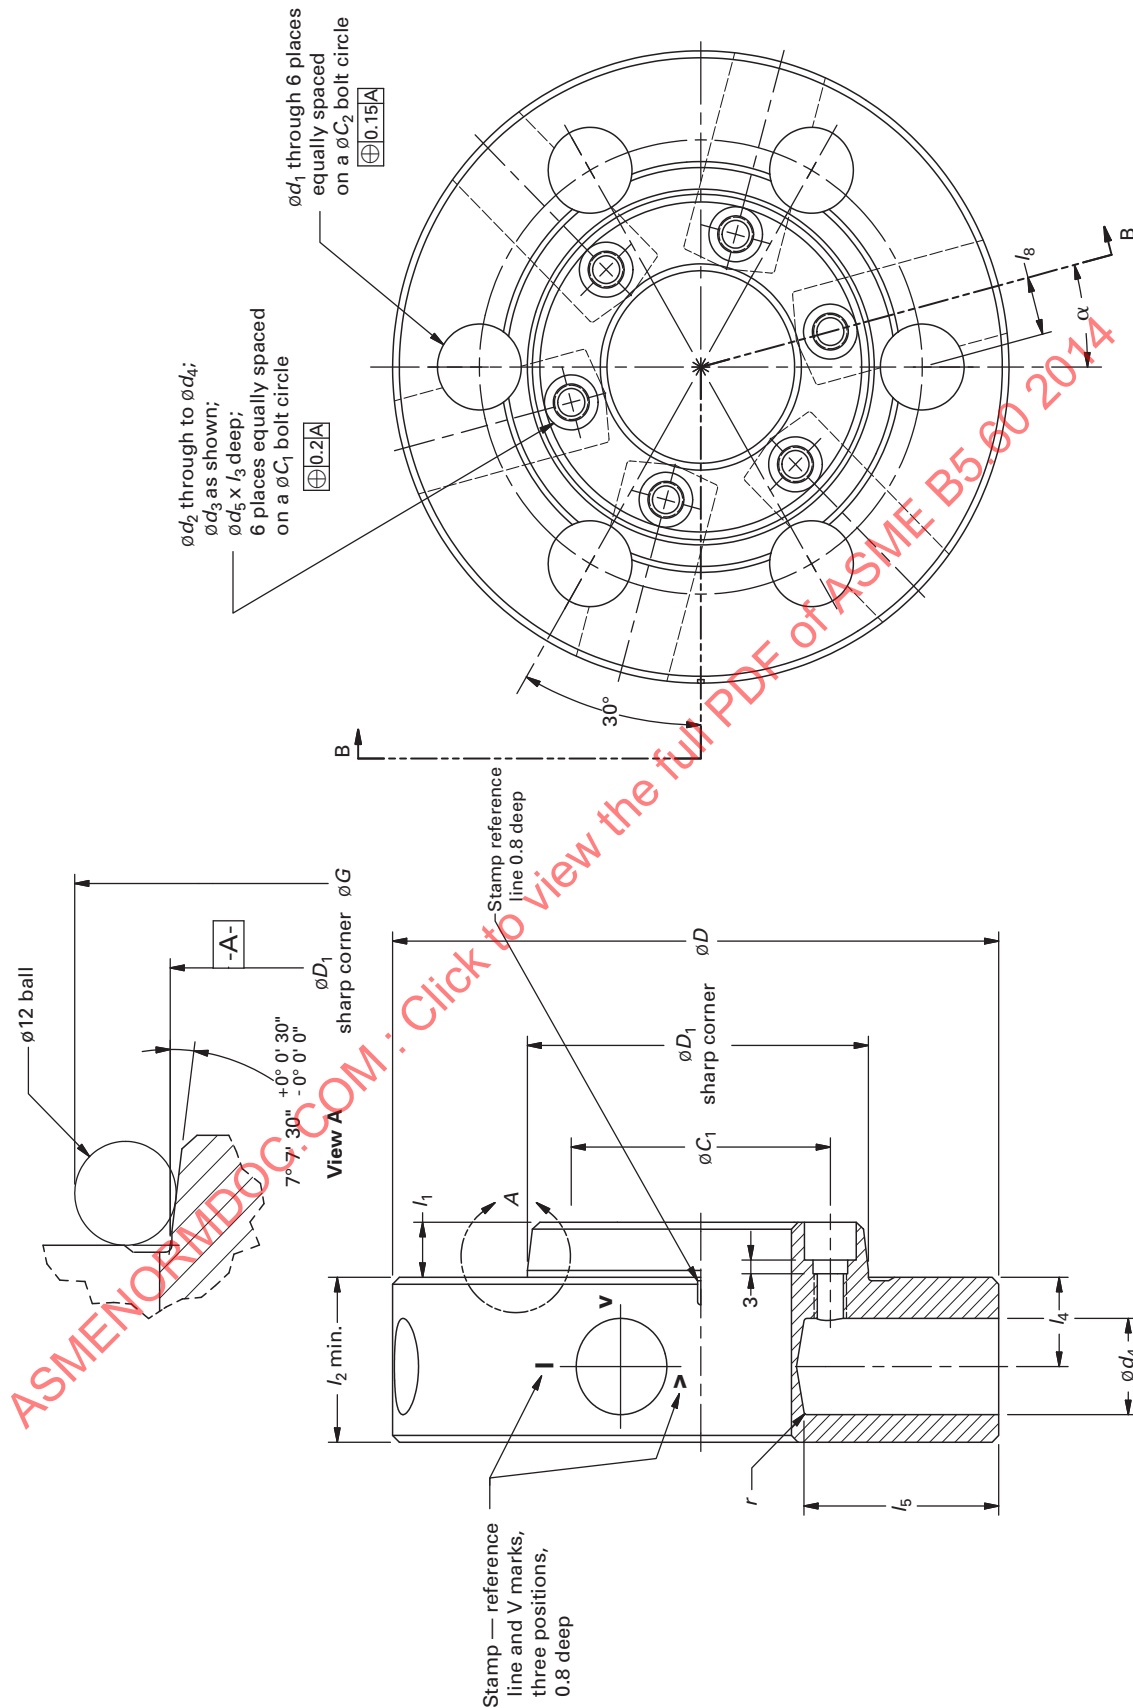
Type D Spindle Location of Holes for Sizes D-5 Through D-20
